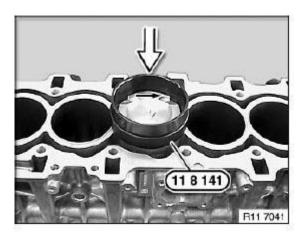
Identifying Piston In Special Tool (11 8 141)
